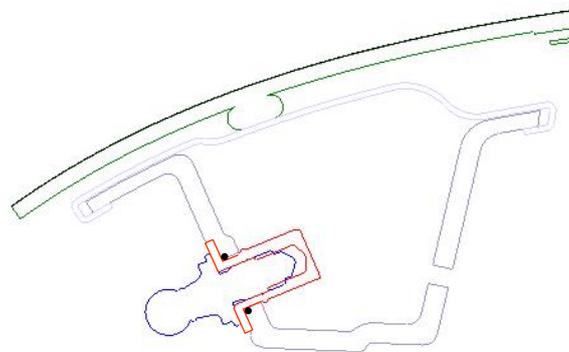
Sectional view of the connecting point of the high pressure spring via the ball pin
